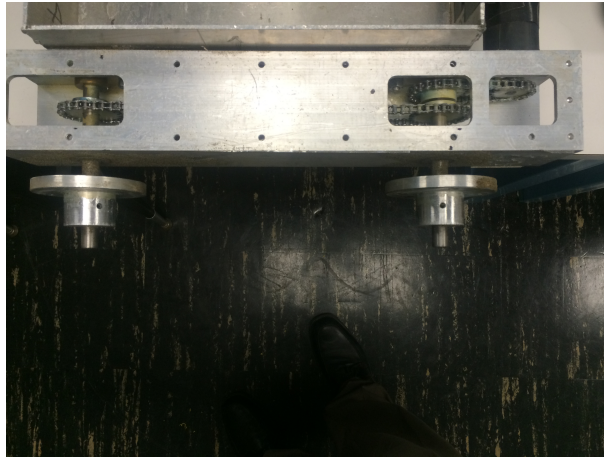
The square aluminum tube houses the drive assembly. The motor is mounted to the outside of the tube. Each transmission is independent of the other.
